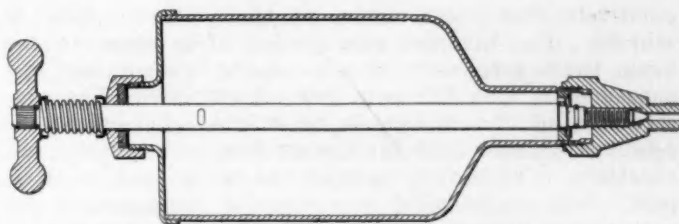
SUPPLY RESERVOIR AND COMBINED NEEDLE VALVE AND PLUNGER PUMP
